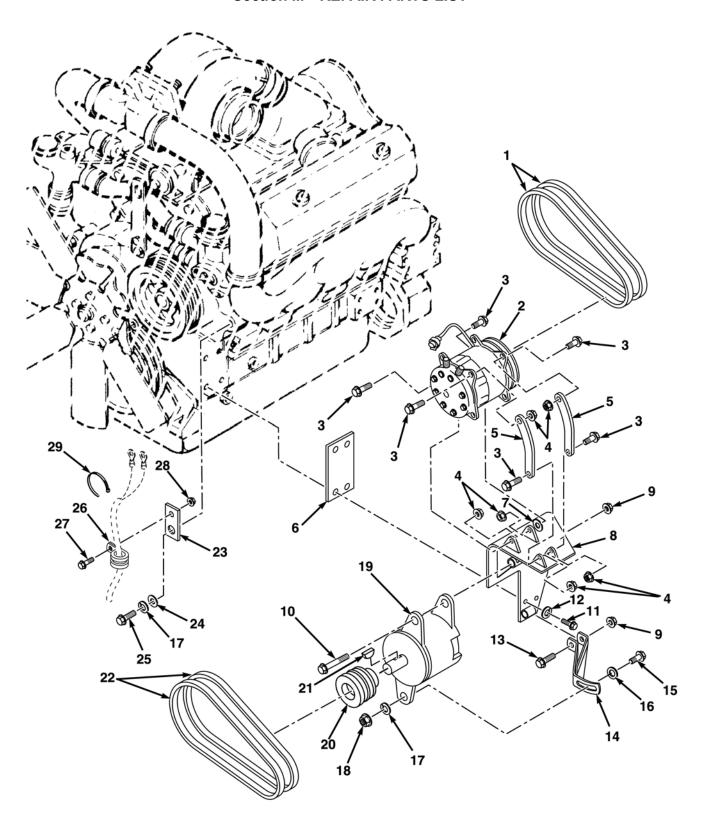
AC ALTERNATOR/COMPRESSOR MOUNTING
